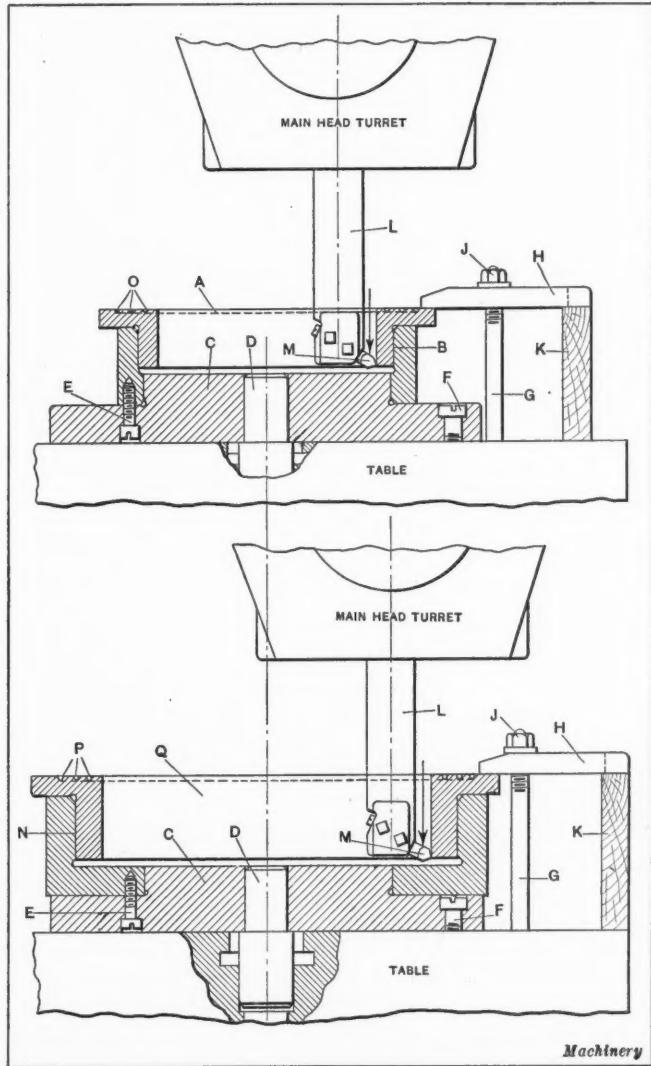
Simple Fixture for holding Three Sizes of Steel Flanges, while boring, facing and cutting Packing Grooves
